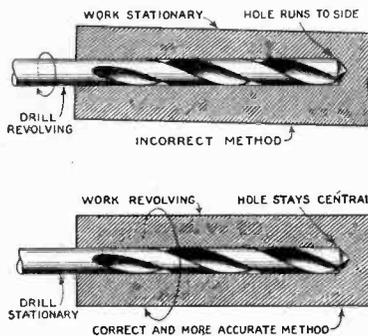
Let the work revolve instead of the drill and deep drill holes will not run off center.
